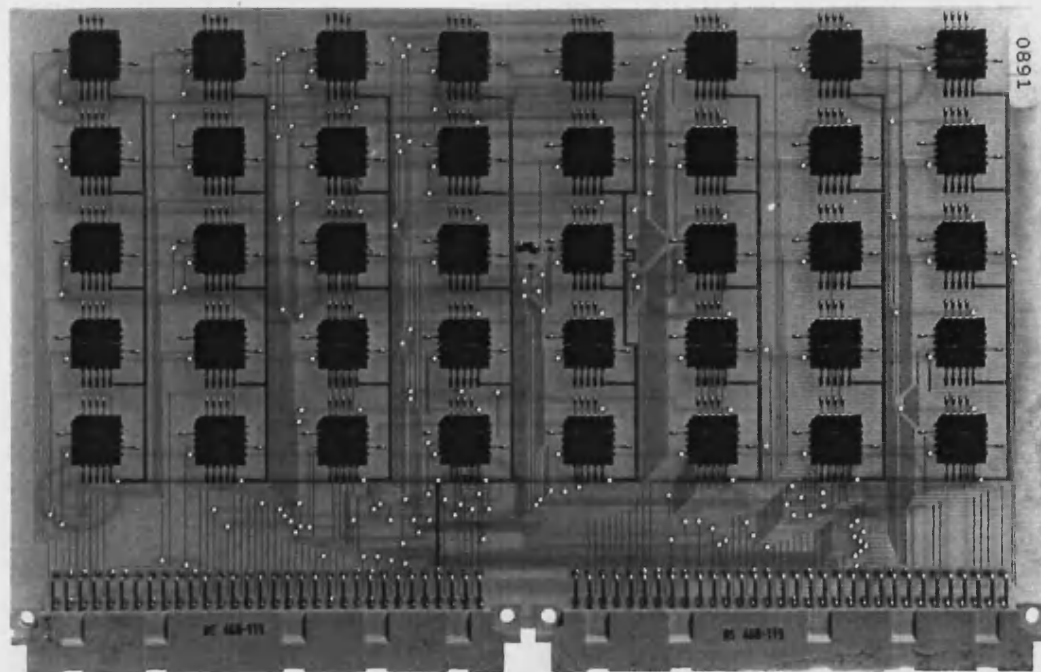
THERMAL TEST BOARD (DEVICE LAYOUT)
